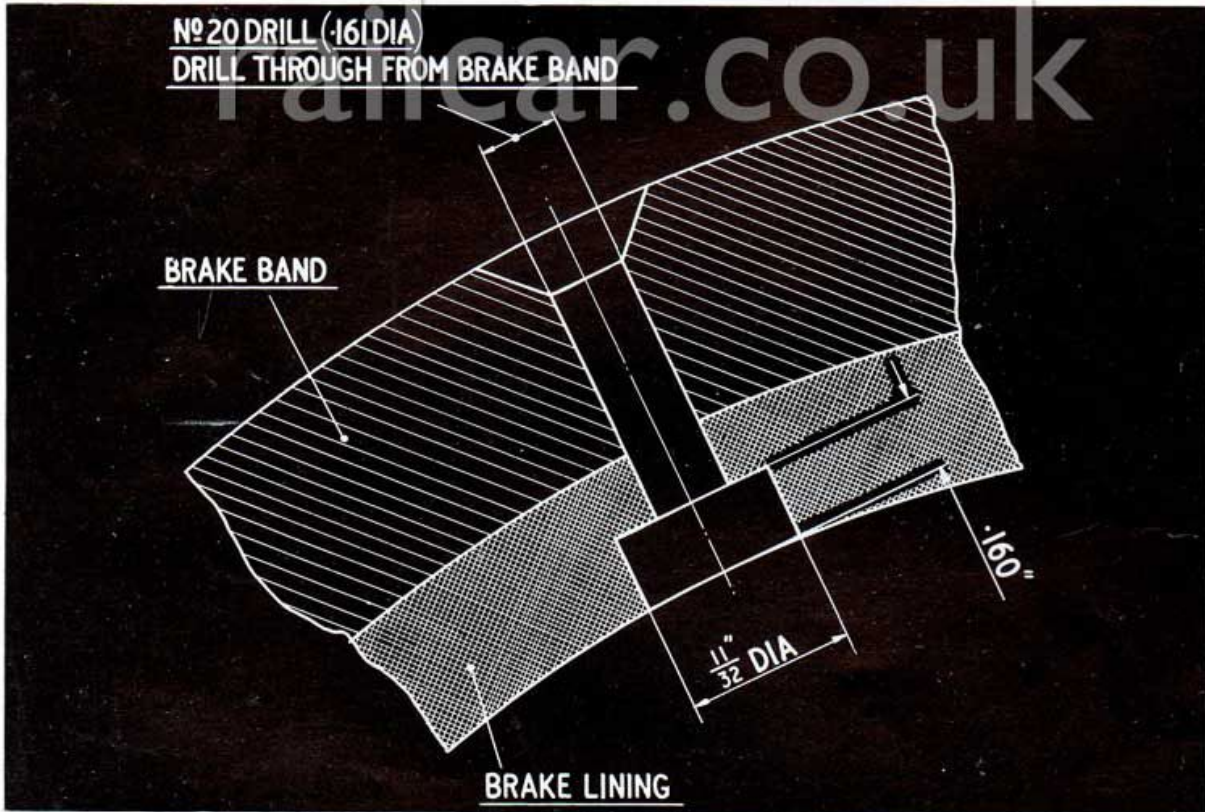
DETAIL OF DRILLING SIZES FOR RIVET HOLE IN INTERNAL AND EXTERNAL BRAKE LINING
